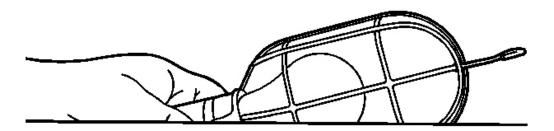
Attaching Drill Motor To EN 45680-411 Courtesy of GENERAL MOTORS CORP.
